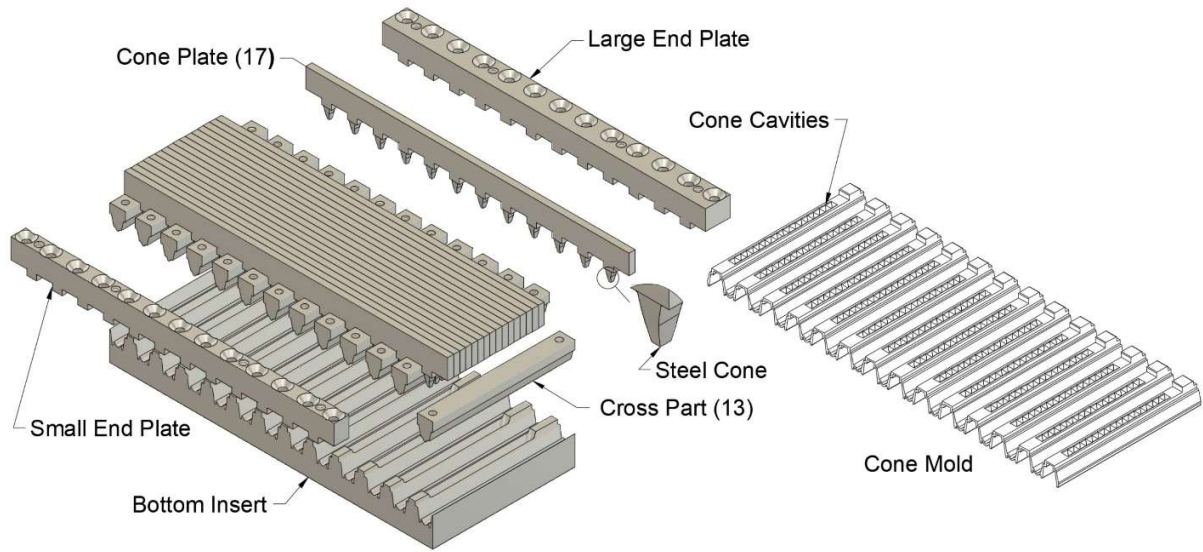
Precision Parts of Mold for Cone Molds and resulting Cone Mold.
